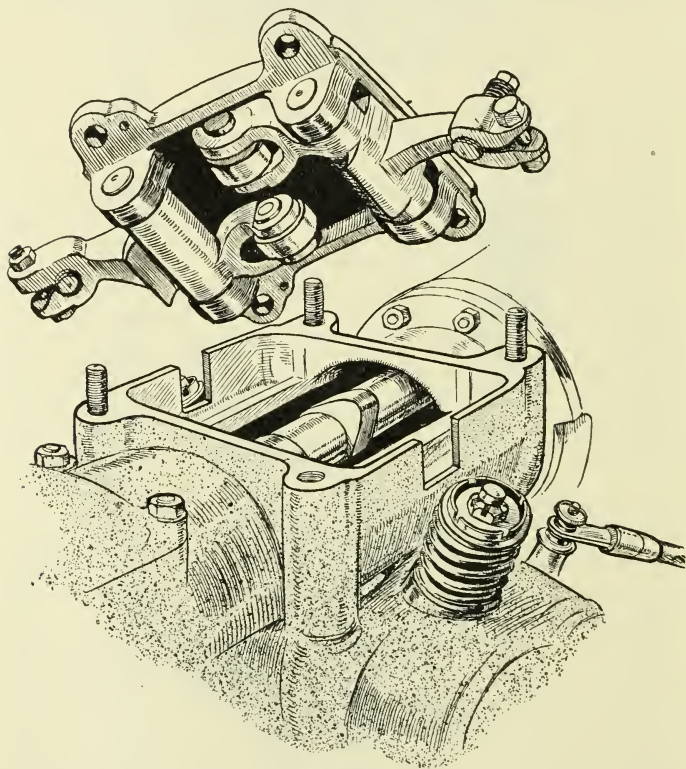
THE OVERHEAD CAM MECHANISM ON THE STRAKER-SQUIRE SIX-CYLINDER ENGINE IN WHICH THE VALVES ON THE OPPOSITE SIDES ARE OUTSIDE THE CAMSHAFT CASING
